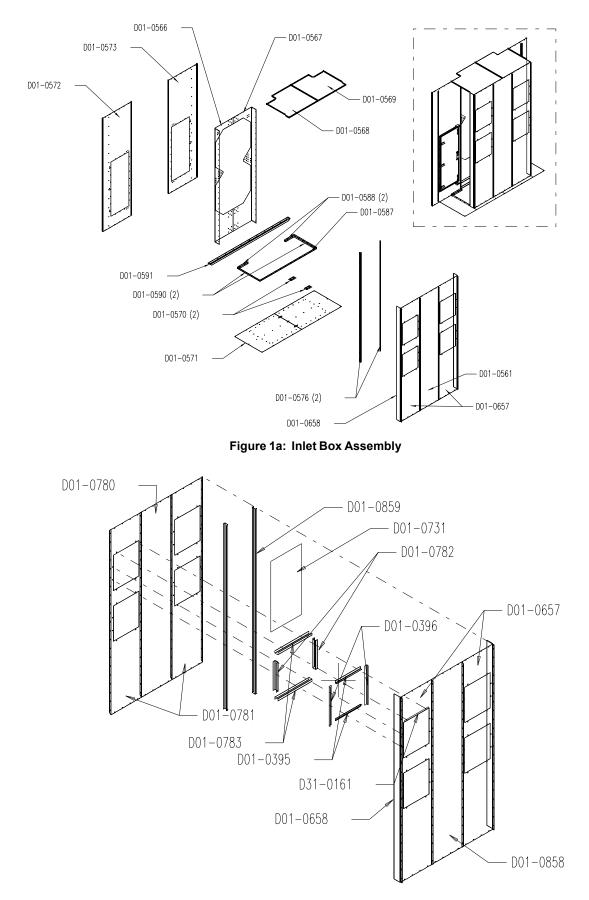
Inlet Box Assembly Noise Suppressor Panel Installation
